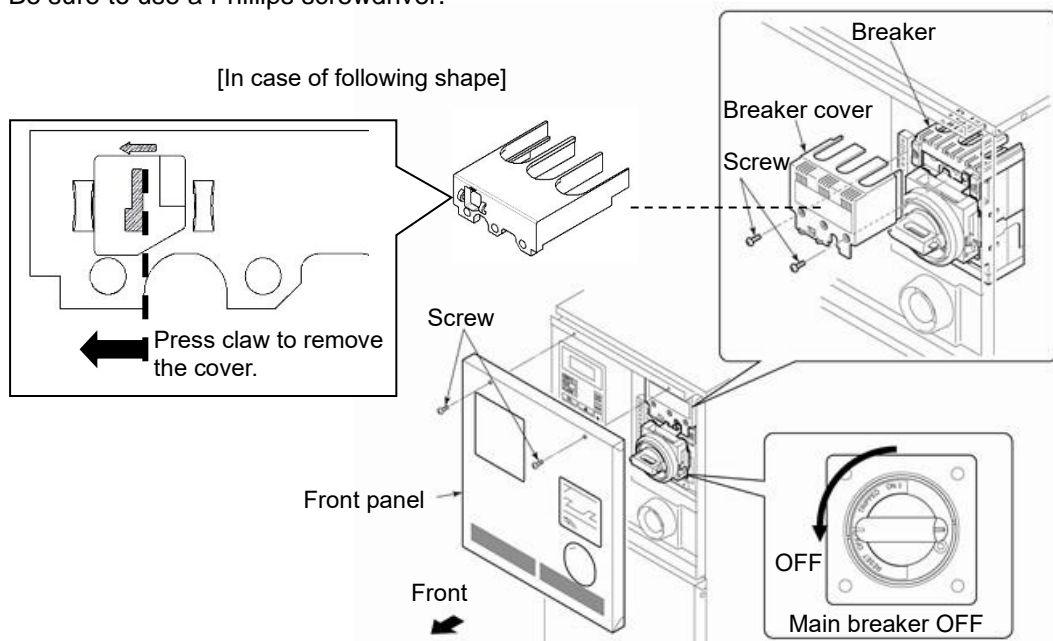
Main Breaker OFF and Removal of Front Panel/Breaker Cover
